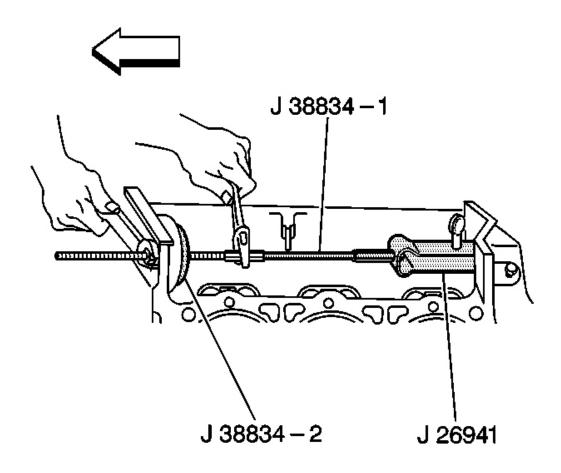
Removing Balance Shaft Rear Bearing Courtesy of GENERAL MOTORS CORP.
